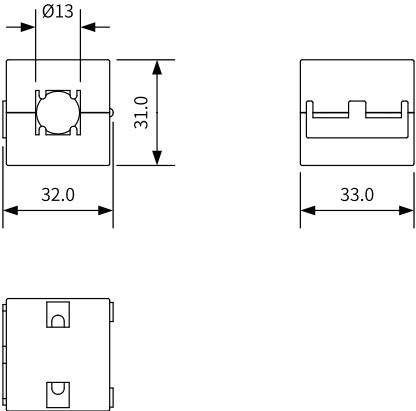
Ferrite clamp dimensions (unit: mm)
